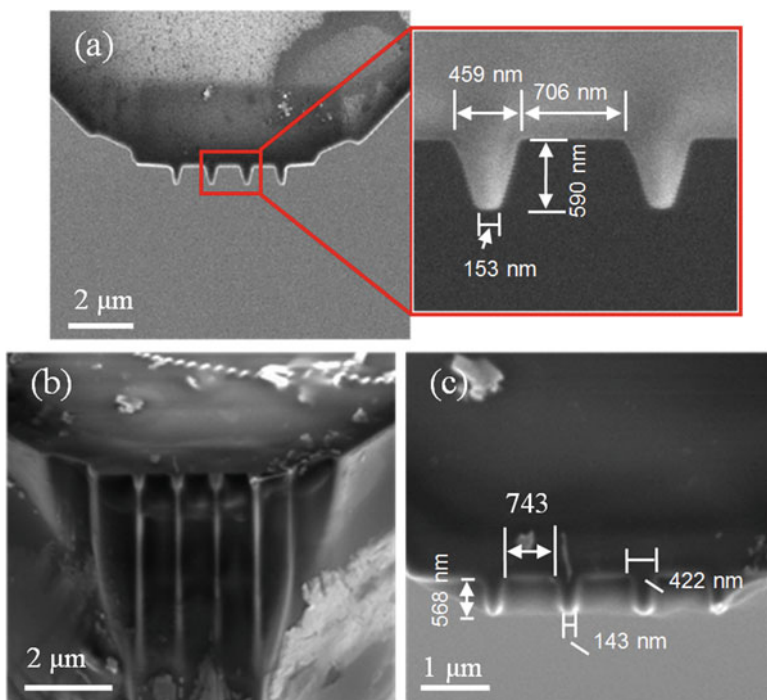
SEM images of the nanoscale multi-tip diamond tool. (a) SEM image of the tool before cutting, (b) SEM image of the tool cutting edges after cutting, and (c) a close-up view of the shape of tool tips after cutting (Tong et al. 2015a)
